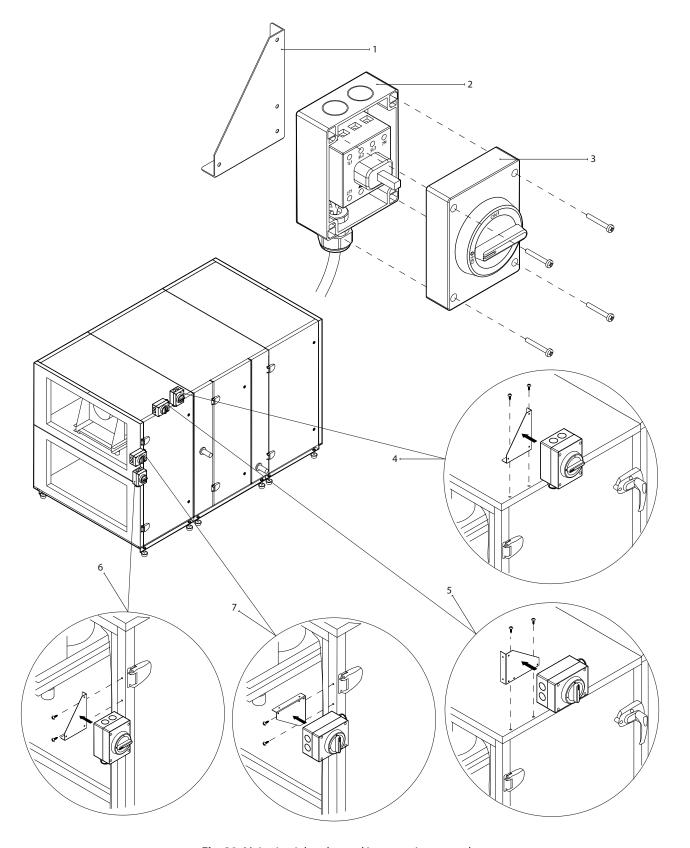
Main circuit breaker and its mounting examples 1 – universal bracket, 2 – circuit breaker, 3 – cover of the breaker, 4 – mounting on top of AHU vertically,
